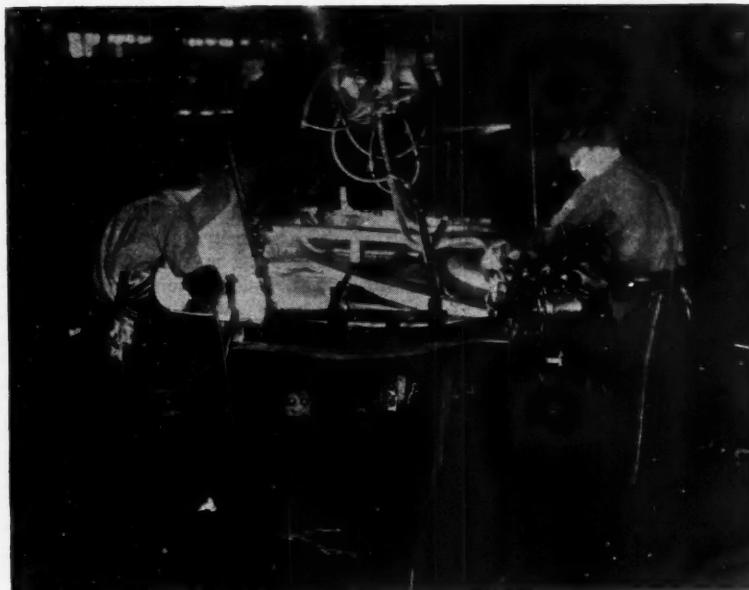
Body panels for Dodge trucks and commercial cars are sub-assembled by welding on jigs. This view shows one of panel body side-panels
